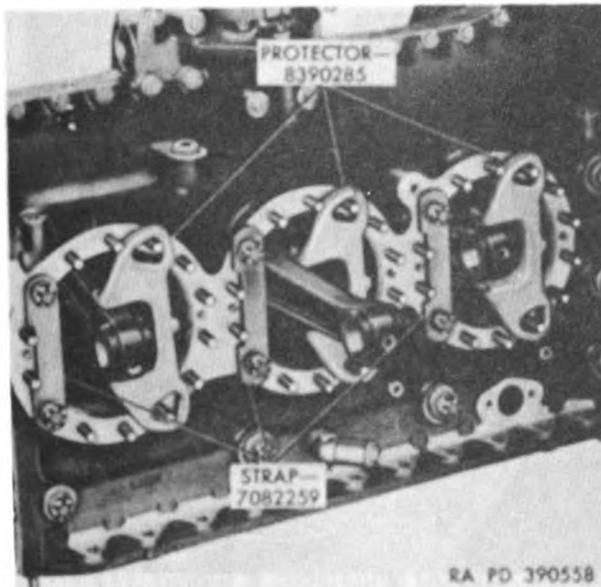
Connecting rod protectors and thru bolt straps installed on crankcase.
